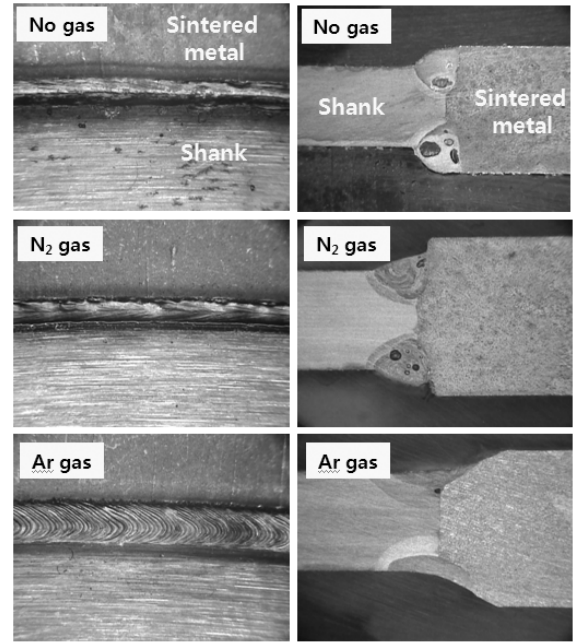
Results for the weldability depend on shielding gas type in CO₂ laser welding
